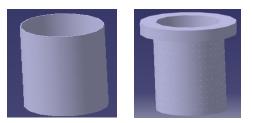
Collecting System for the Paste: Outer Container (left) and Inner Filter Container (right)
